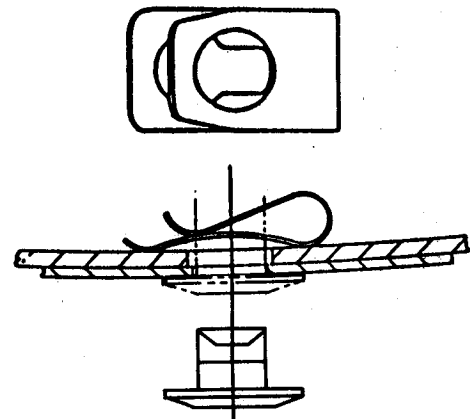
Ceramic Composite Liner Panel Attachment Methods
